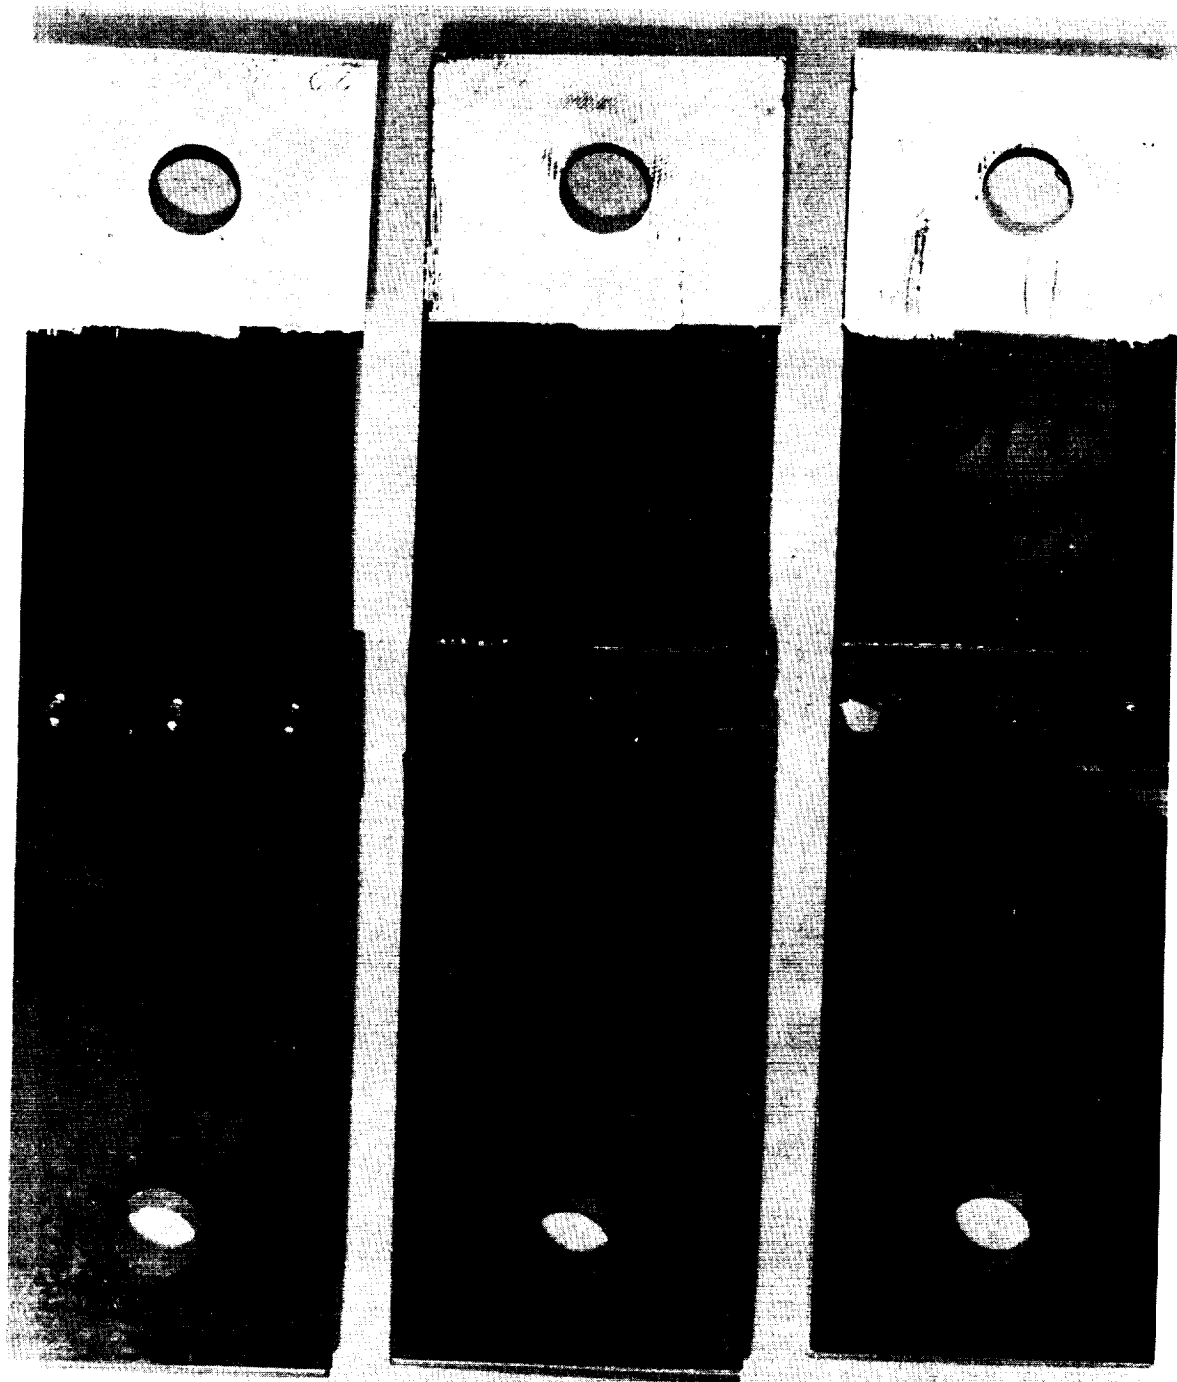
TYPE IF SPECIMENS - 0.030-INCH MATERIAL - TYPICAL FAILURE MODE
